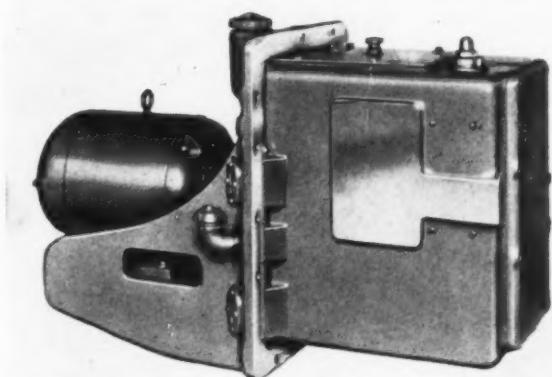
Barnes Hydraulic Feed Unit Adapted for Heavy Boring and Drilling Operations
